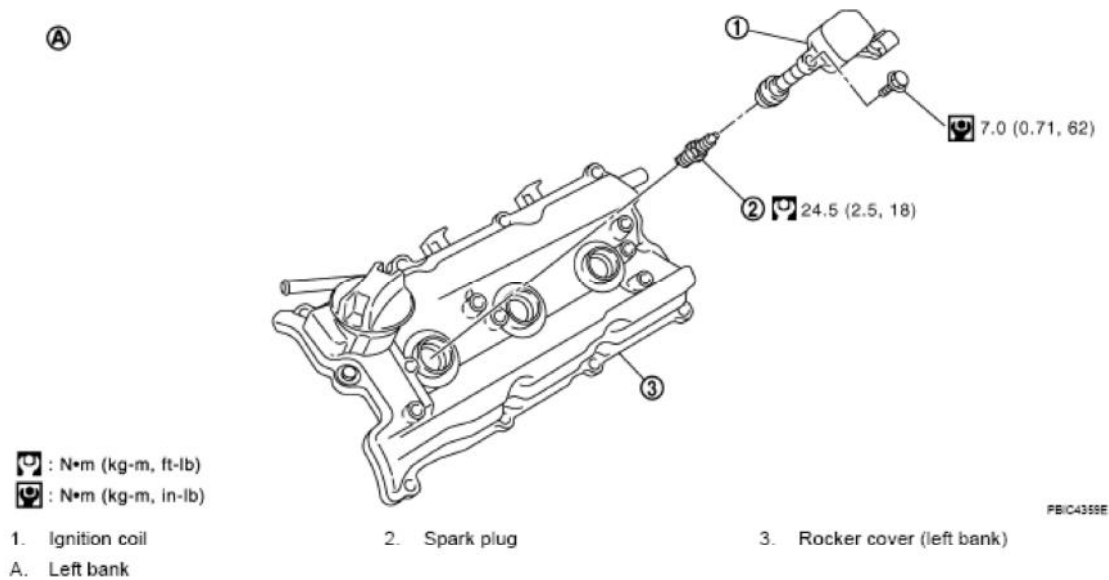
Identifying Ignition Coil Components With Torque Specifications
